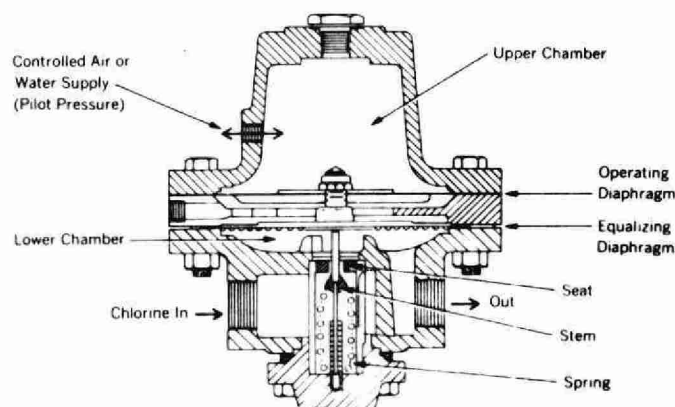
CHLORINE PRESSURE REGULATING VALVE
